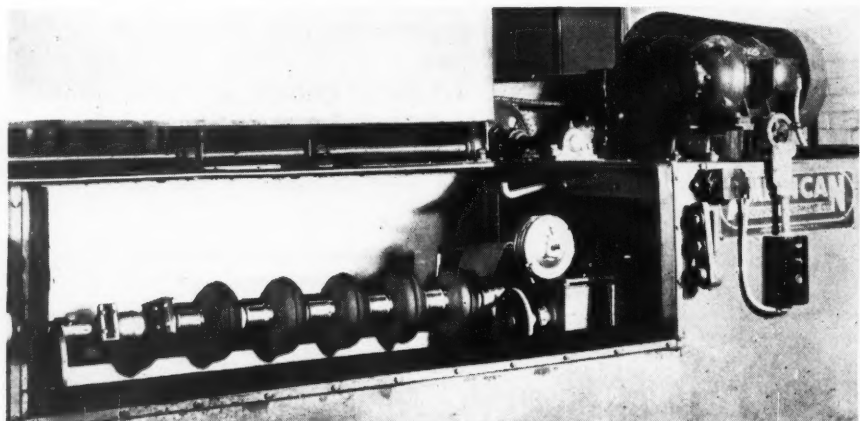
A special cabinet installed at Curtiss-Wright Corp., Propeller Div., Indianapolis, Indiana, for peening the threads and thread reliefs on variable pitch propeller gears. Ten gears are mounted on an arbor and the gear teeth are masked during the operation. Note the two Almen Test Strips mounted on the left end of the arbor.
